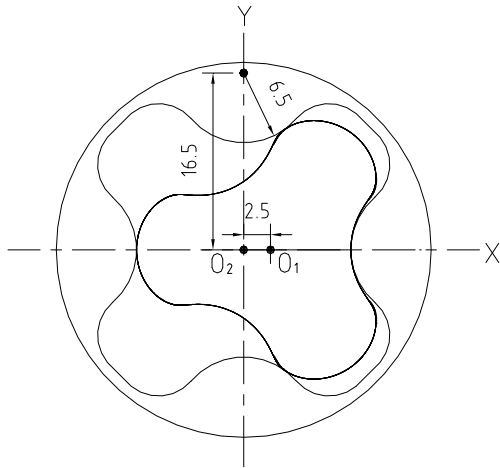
Profiles of inner rotor and outer rotor used in the analysis
